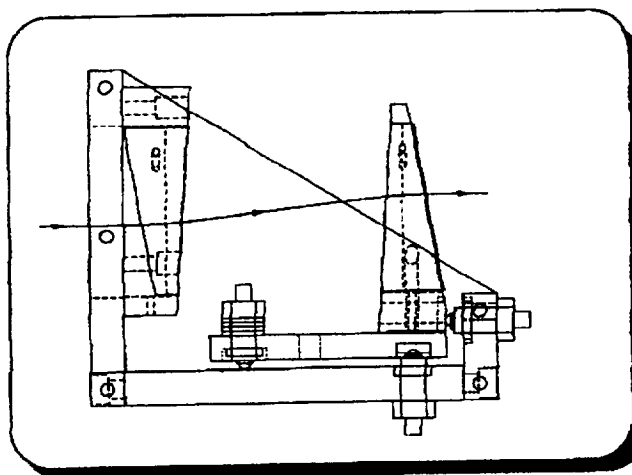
Wedge pair assembly. Left wedge is fixed; right wedge is adjustable with five fine adjustment screws.
